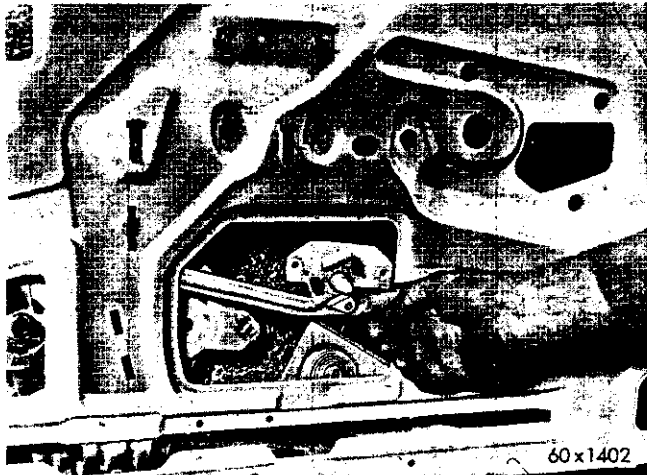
Removing the Remote Control Assembly (Chrysler)
